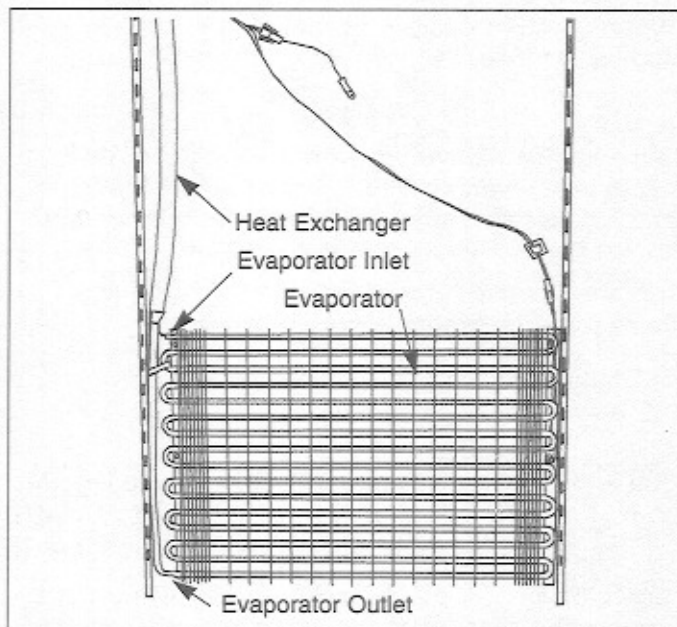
Model 611, 632, 642, 650, 690 Refrigerator Evaporator Area
